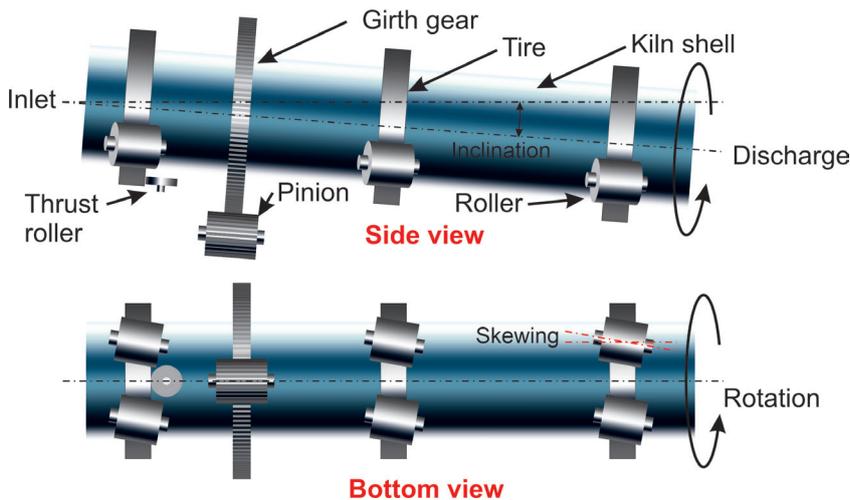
Top: Side view of inclined kiln. Bottom: Bottom view showing the skewed rollers.
